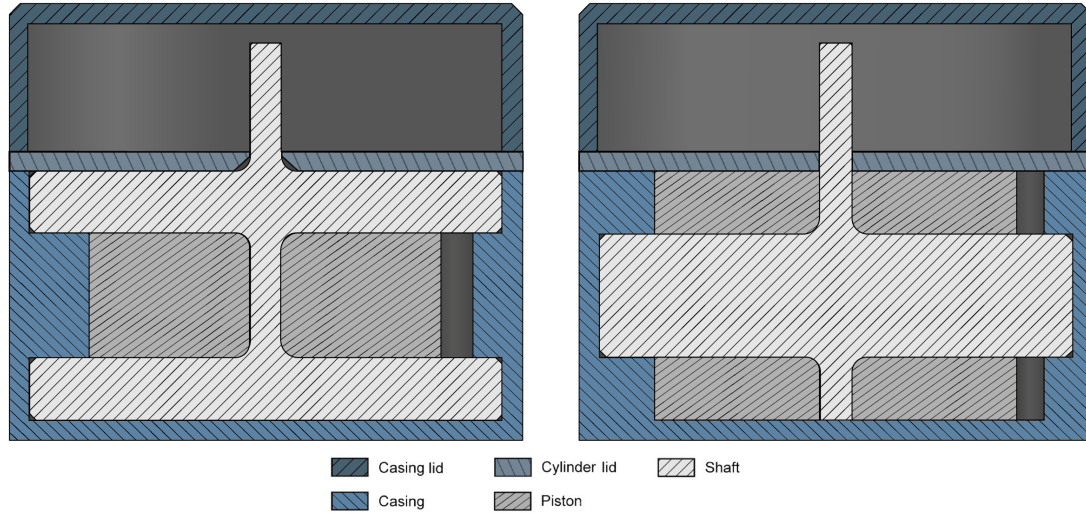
Conceptual designs to prevent a moment on the shaft rotary bearing by implementing a split bearing or split compression chamber.
